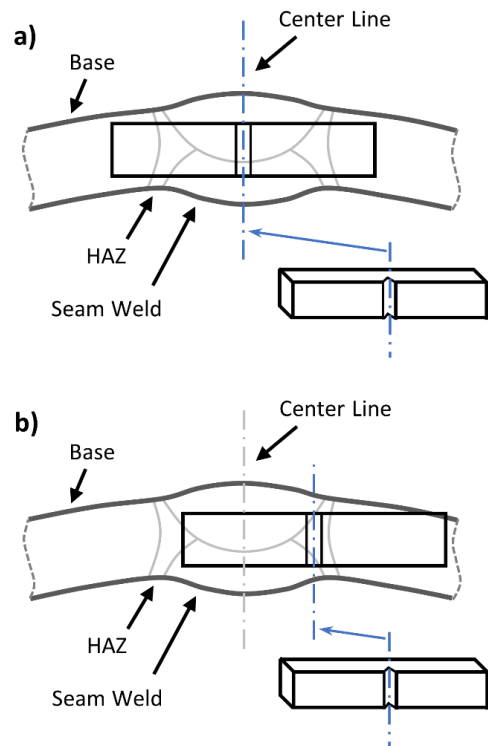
ANNOTATED DIAGRAM OF THE CROSS SECTION OF A SEAM WELD THAT ILLUSTRATES HOW CHARPY SPECIMENS WERE EXCISED FROM THE PIPELINE SAMPLES. a) "WELD" SPECIMENS WERE POSITIONED WITH THE CHARPY NOTCH PARALLEL TO THE FUSION LINE. b) "HAZ" SPECIMENS SAMPLED THE HEAT-AFFECTED ZONE WHICH IS LOCATED ON EITHER SIDE OF FUSION LINE. SPECIMENS THAT SAMPLED THE BASELINE MATERIAL, OR "BASE" MATERIAL, WERE TAKEN FAR AWAY FROM THE WELD. THE POSITIONS AND ORIENTATIONS OF THE SINGLE-EDGE NOTCHED BEND SPECIMENS WERE THE SAME AS THE CHARPY SPECIMENS. NOT DRAWN TO SCALE.
